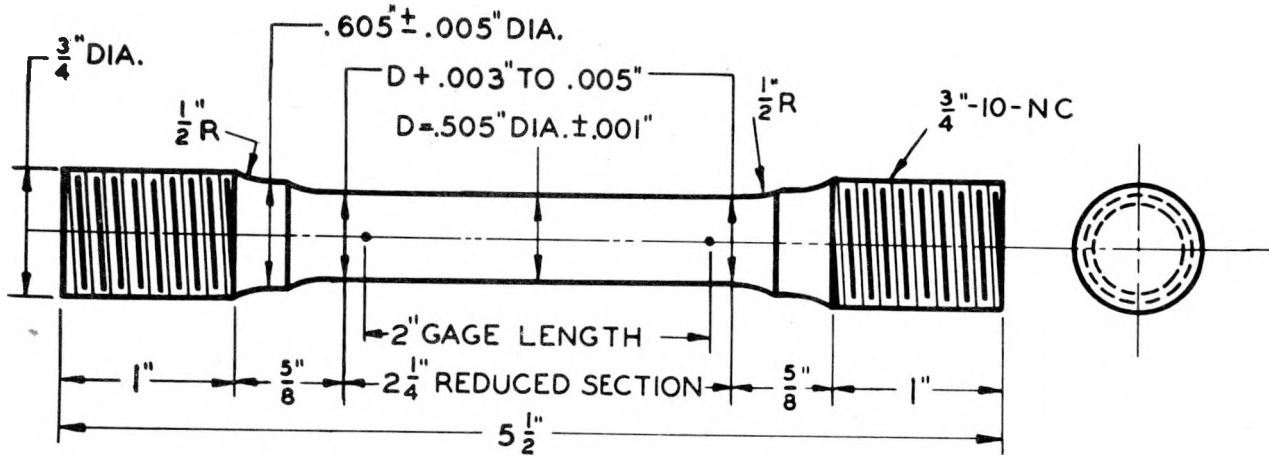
Test specimen employed in high-temperature tensile and stress-rupture test programs.
